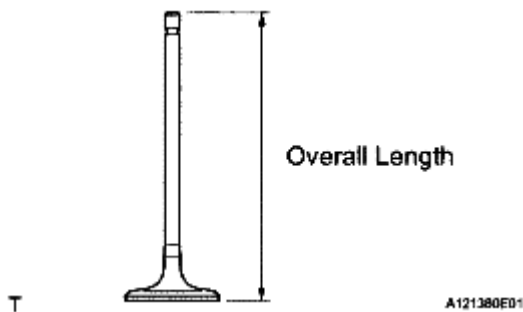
Measuring Valve's Overall Length Using Vernier Calipers
